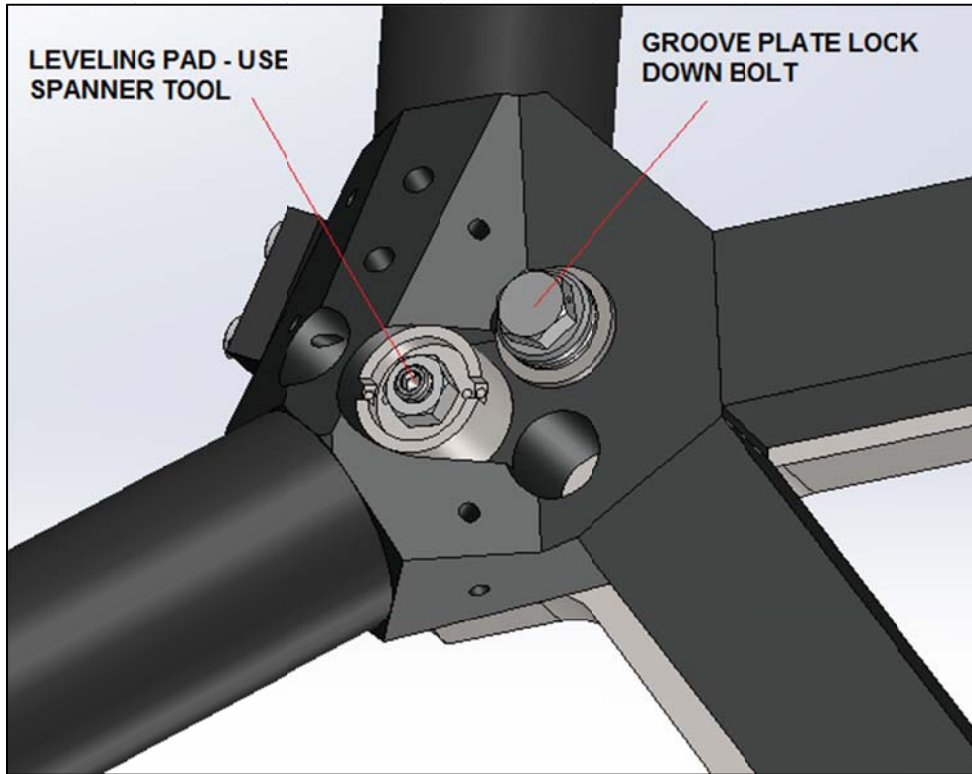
Off axis tip/tilt/piston adjustments and hardware. Lock nut on leveling pad is drilled and lock down bolt is drilled head for safety wire after final alignment.
